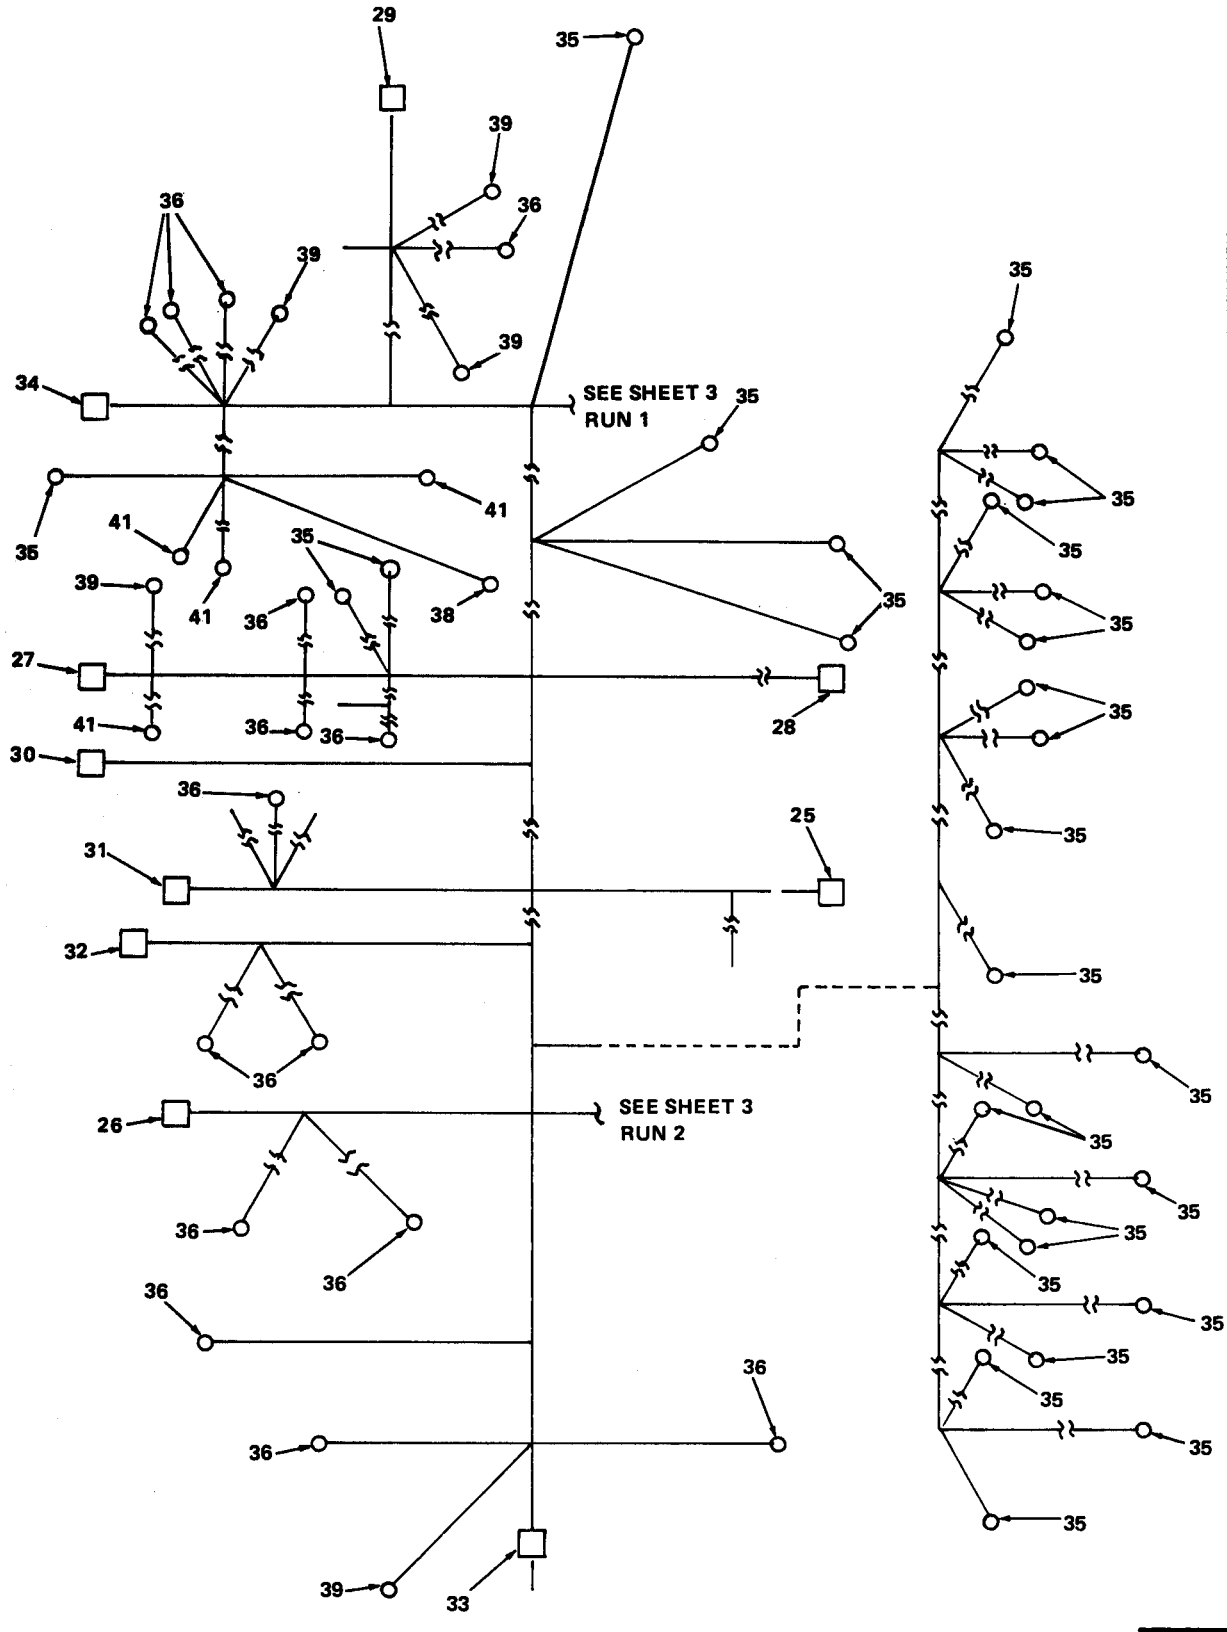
Special Relay Assembly (Sheet 1 of 3)
